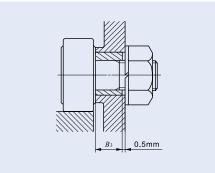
Length of the mounting hole of Eccentric Type Cam Follower
